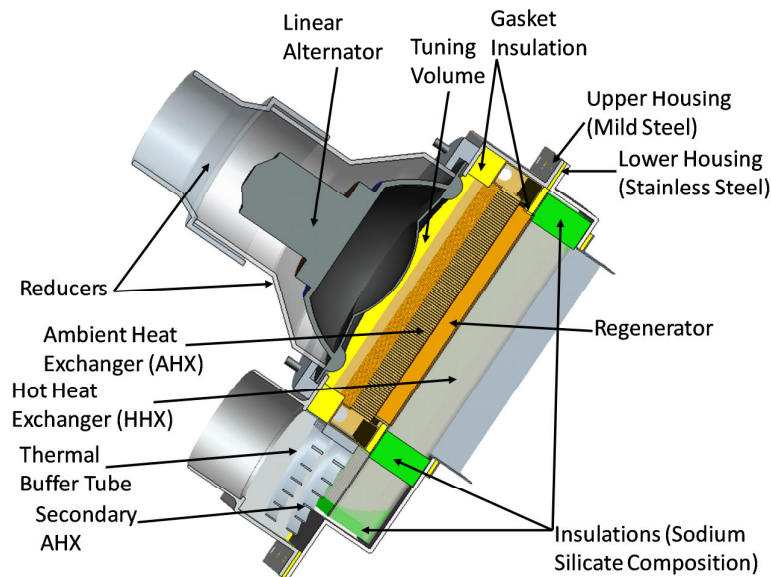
Cross Section Layout of a Single-Stage Demo2.1 TAE Design in Malaysia.
